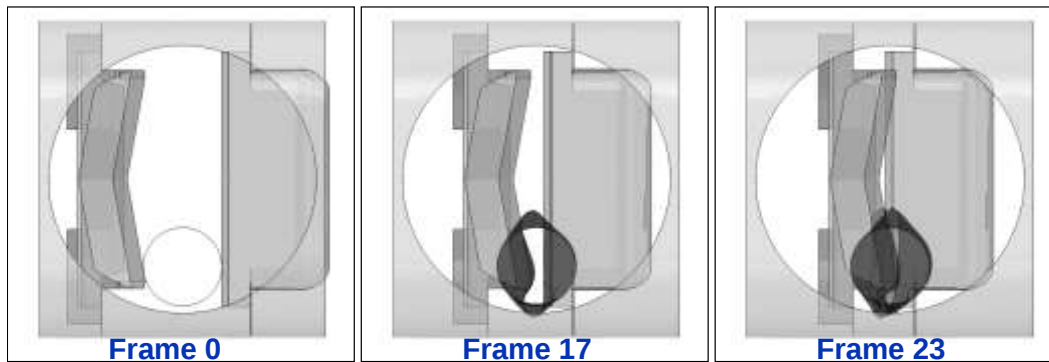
Top View Showing Deformation of Drill Pipe Outside of Shearing Blade Surfaces
